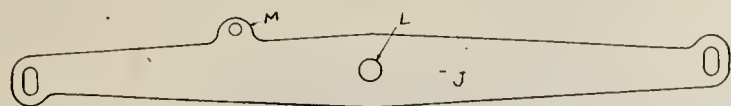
DEVICE FOR REGULATING THE BRAKING POWER OF CARS.
